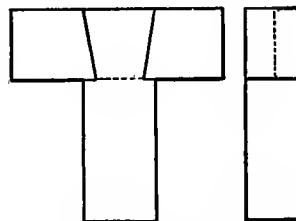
Mechanical Drawing of Dove-Tail Joint
